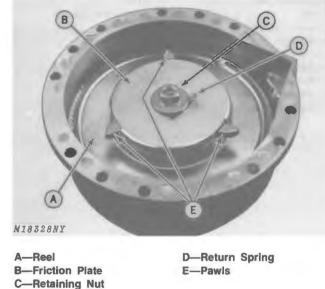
Inspecting Pawls, Friction Plate and Return Spring
